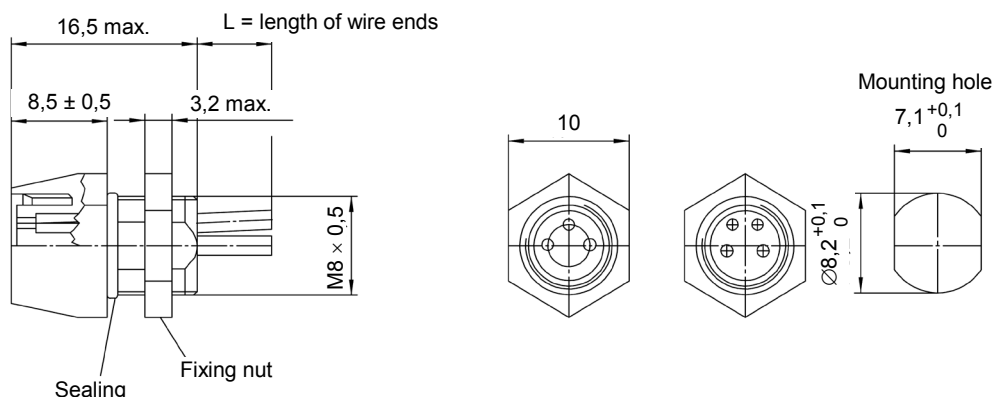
Fixed connector with wire ends, female contacts, single hole mounting
